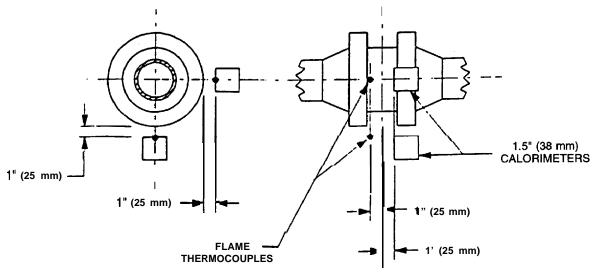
Location of Thermocouples and Calorimeters-Smaller Wafer Type Check Valves
